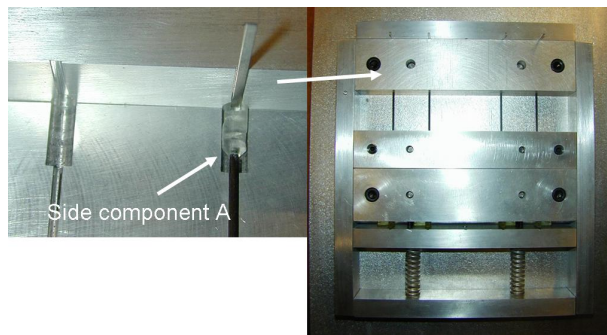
Fixture 1 connects the carbon fiber with the A type joints.
